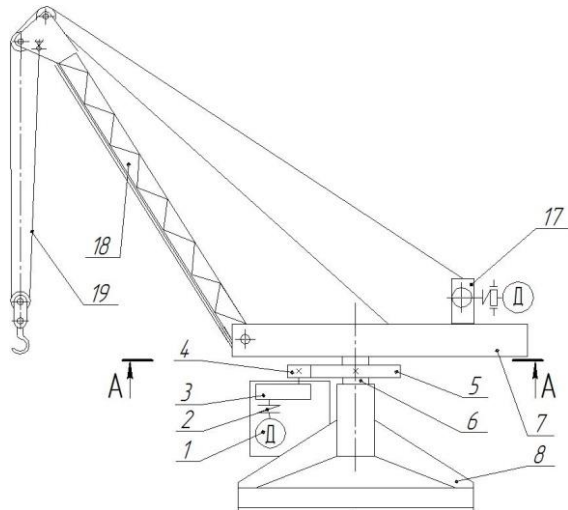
Jib crane: 1 – engine; 2 – elastic coupling; 3 – reducer; 4 – gear; 5 – slewing ring; 6 – rotary shaft; 7 – rotary part; 8 – frame.
